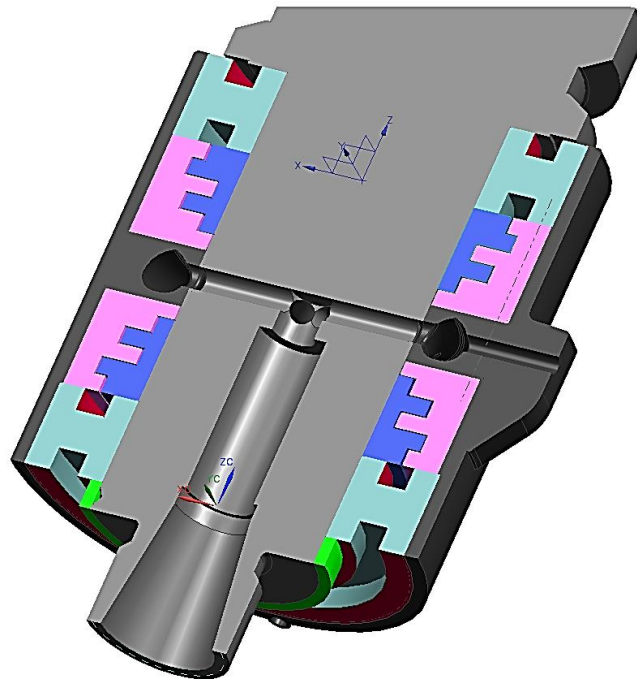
CAD cutaway with horizontal labyrinth seals
